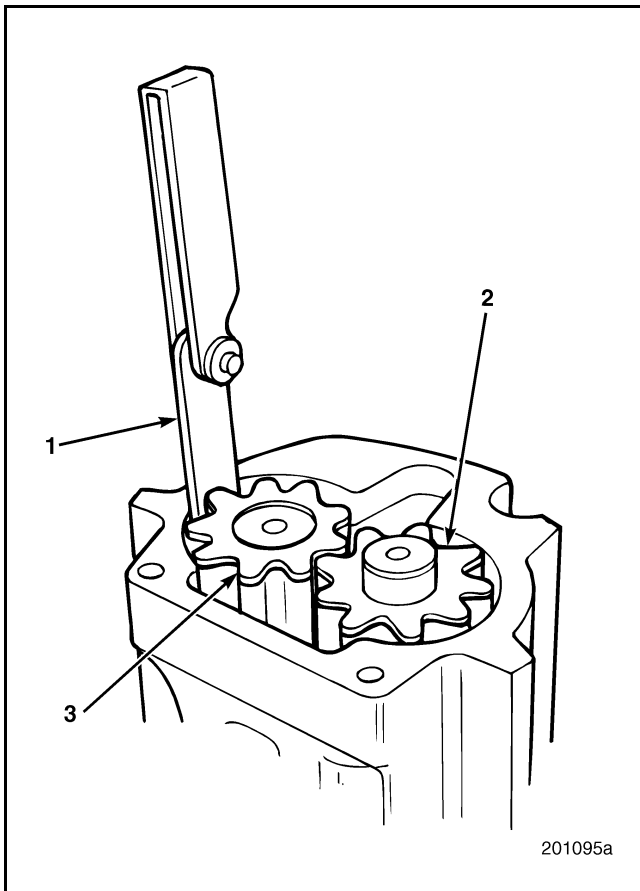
Oil Pump Gear/Idler Gear Assembly Side Clearance Check
